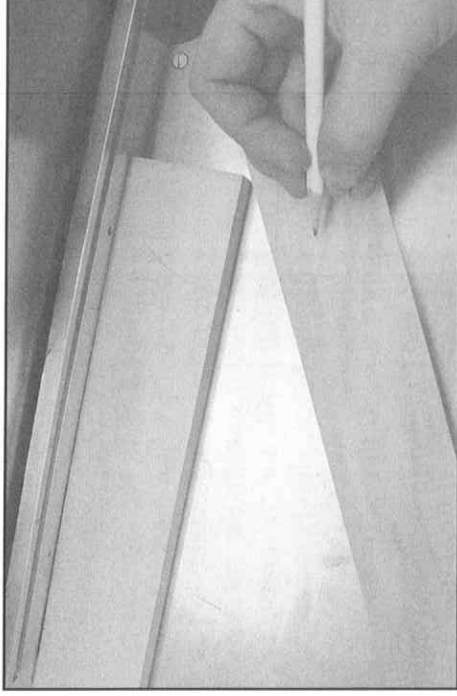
Layout the pin and socket pieces making indicator marks on the backside of the pieces.
